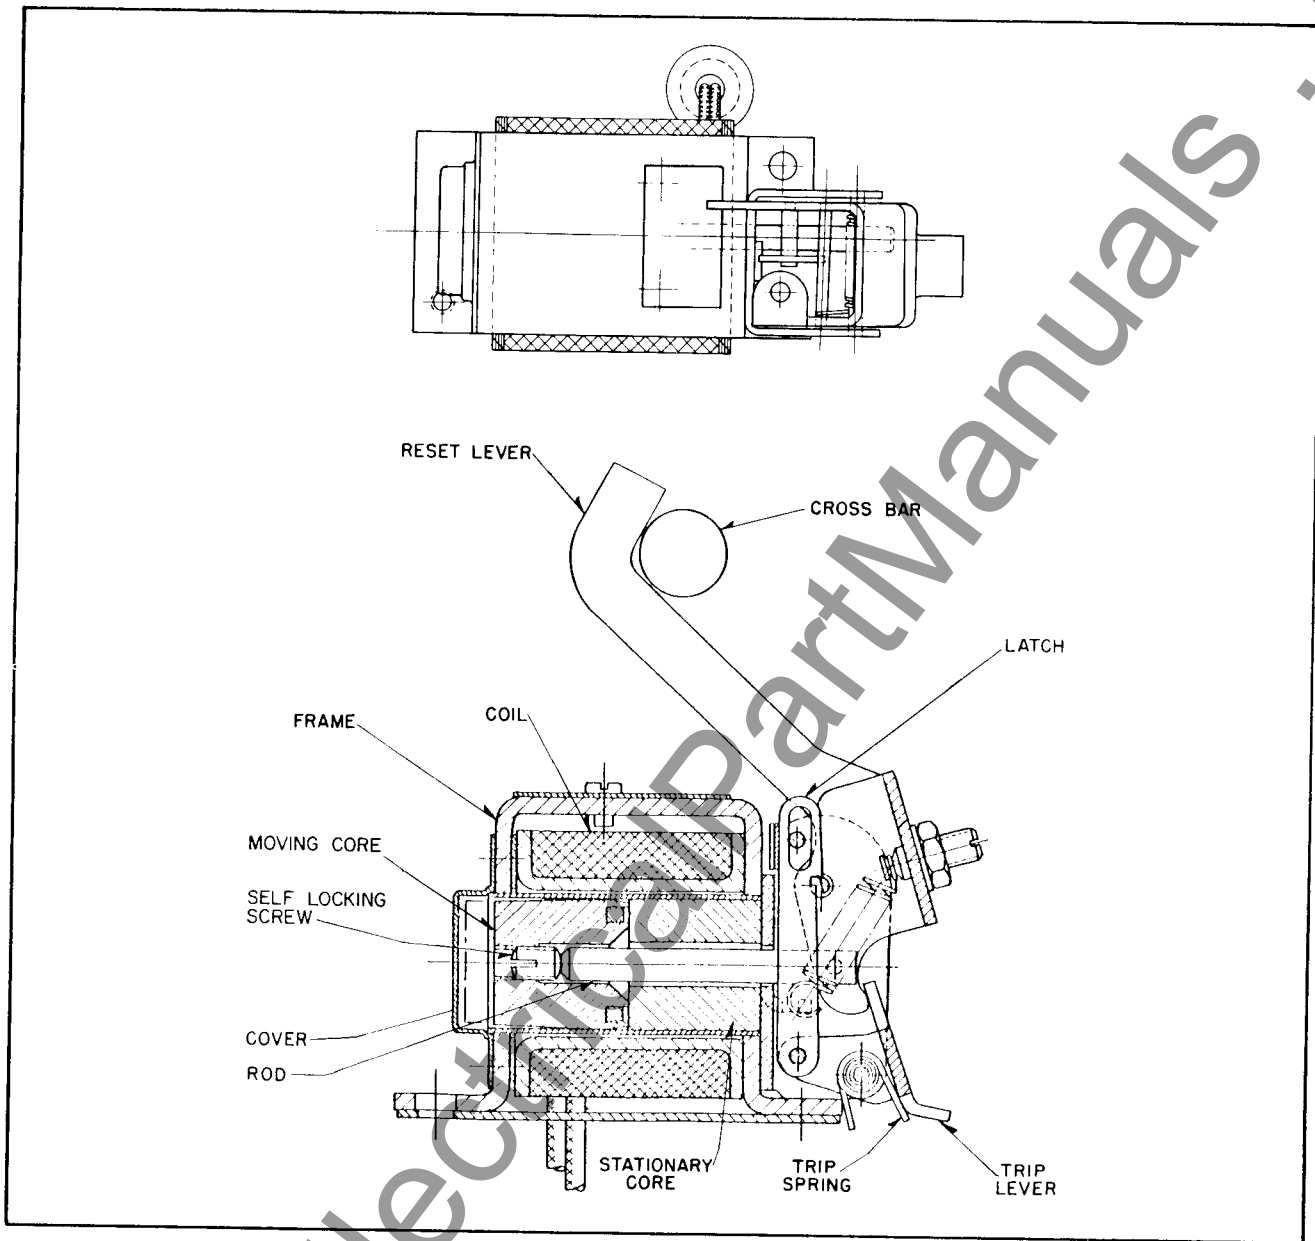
Undervoltage Trip Attachment - Construction Details
